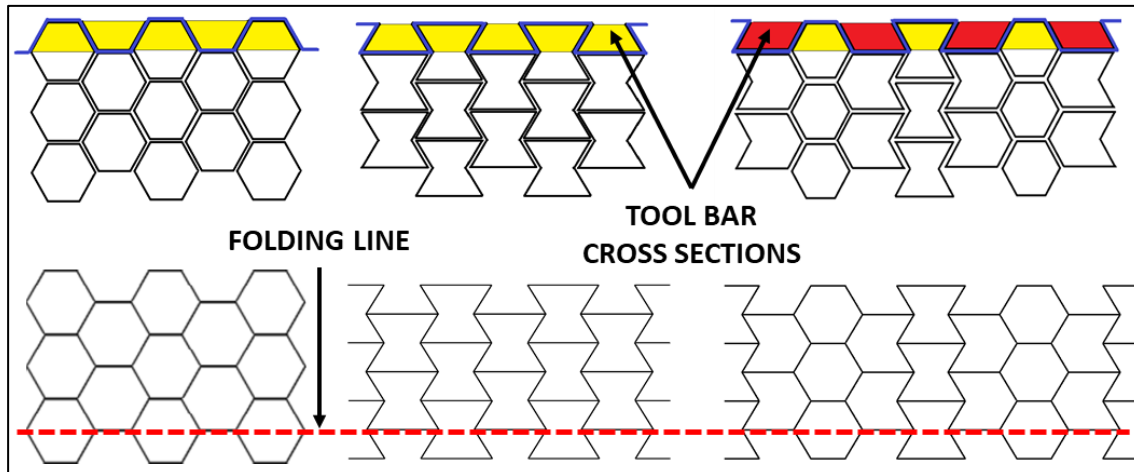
Examples of kirigami allowed patterns and mold bar cross-sections: Trapezoidal bars in yellow and parallelogram bars in red.
